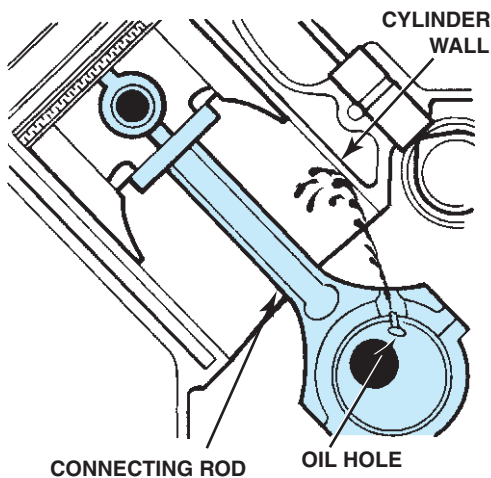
Some connecting rods have spit holes to help lubricate the cylinder walls or piston pins.
